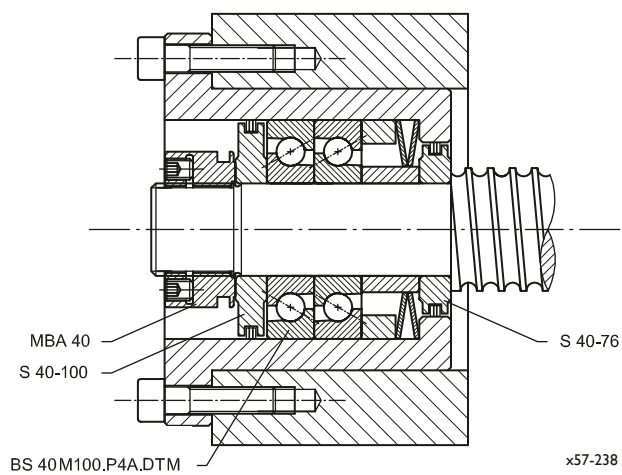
Sealing of a spring-preloaded floating bearing at a ball screw with two labyrinth seals of the S series
